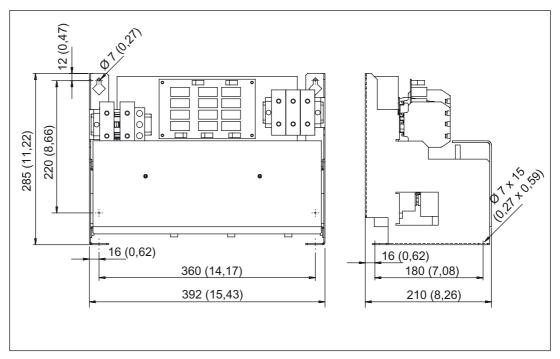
Dimension drawing of the voltage peak limiter, type 2
